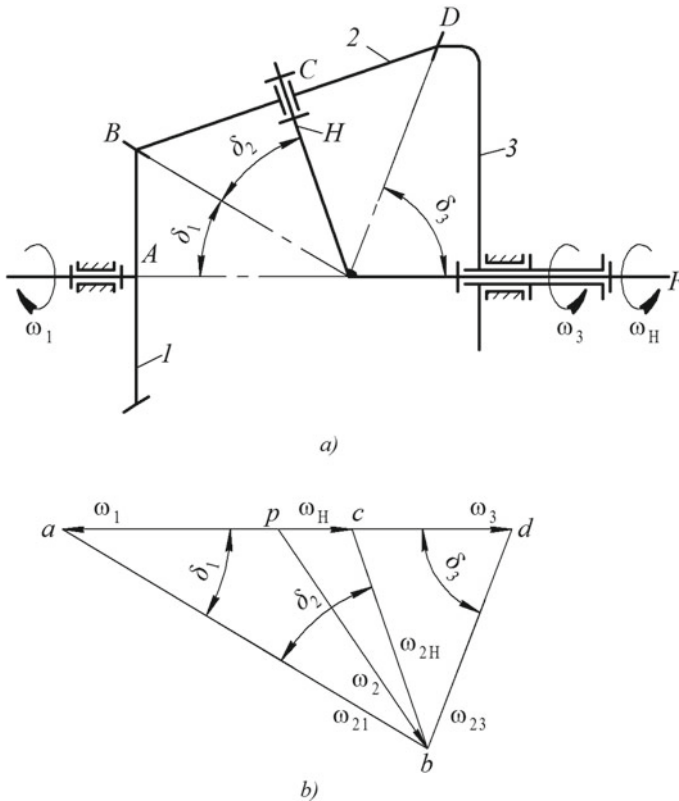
Bevel planetary gearbox: a scheme of mechanism; b angular velocity diagram
